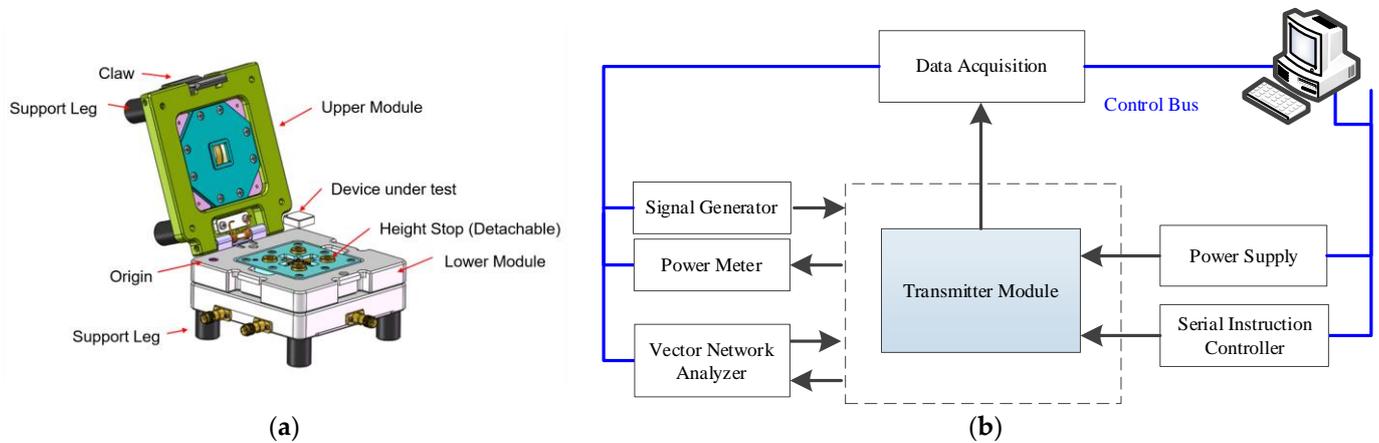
(a) Test fixture for the transmitter module. (b) Test setup of the transmitter module.
